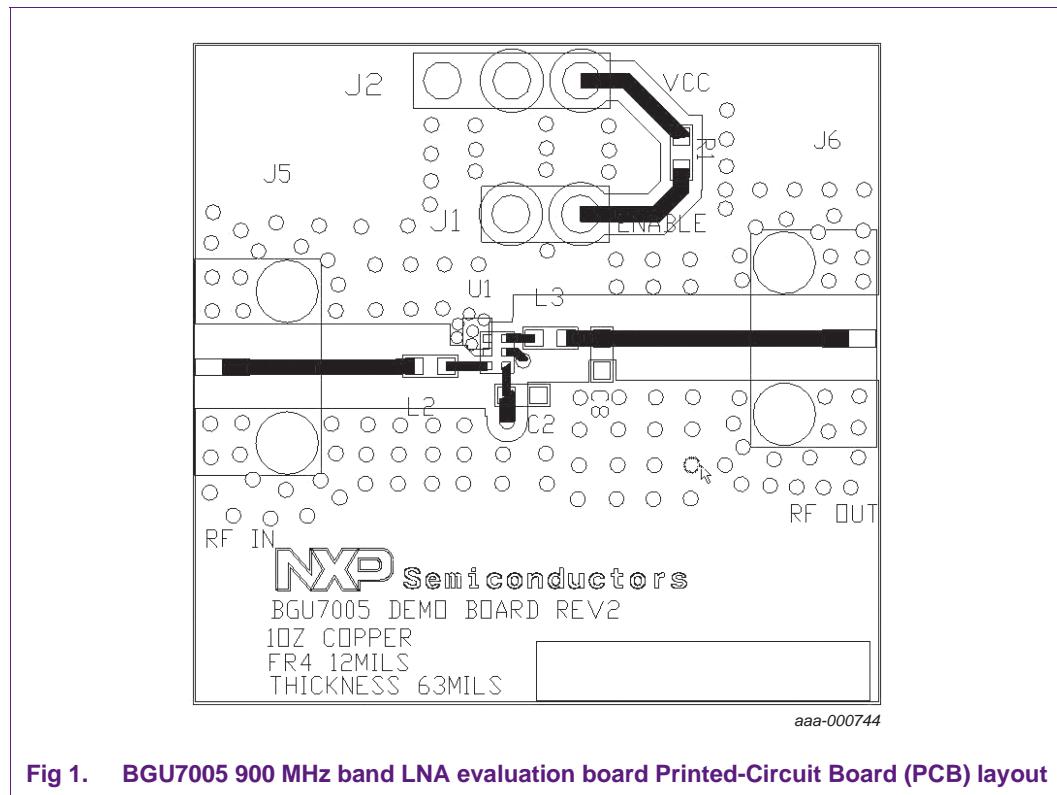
BGU7005 900 MHz band LNA evaluation board Printed-Circuit Board (PCB) layout
